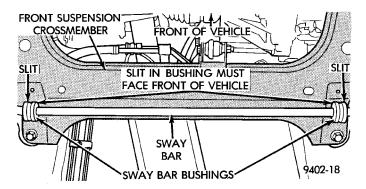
Correct Stabilizer Bar To Crossmember Bushing Installation
